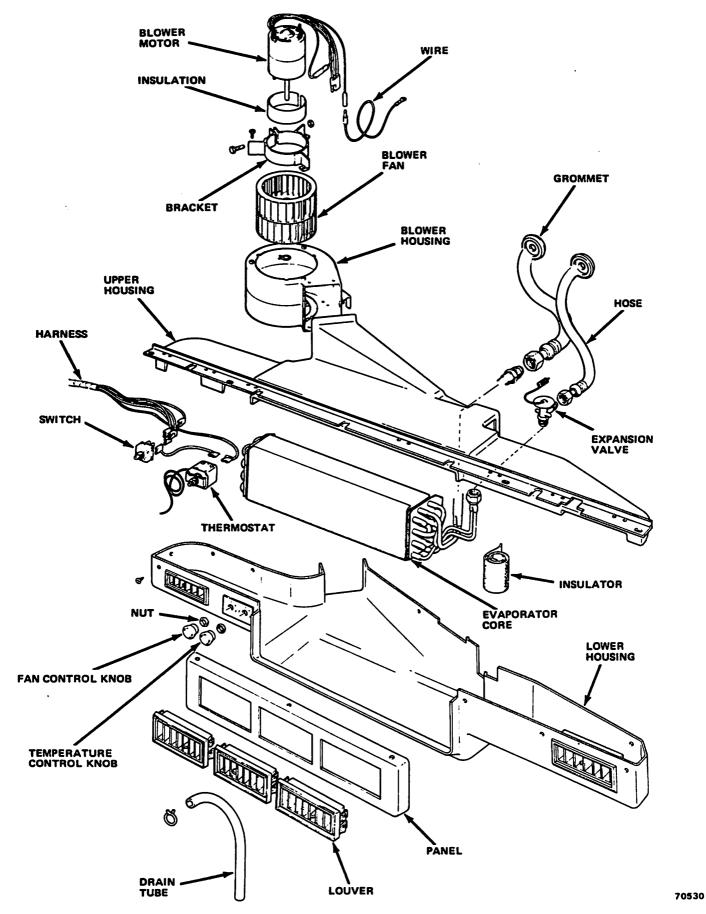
E-5 Evaporator Housing Assembly—CJ and Scrambler
